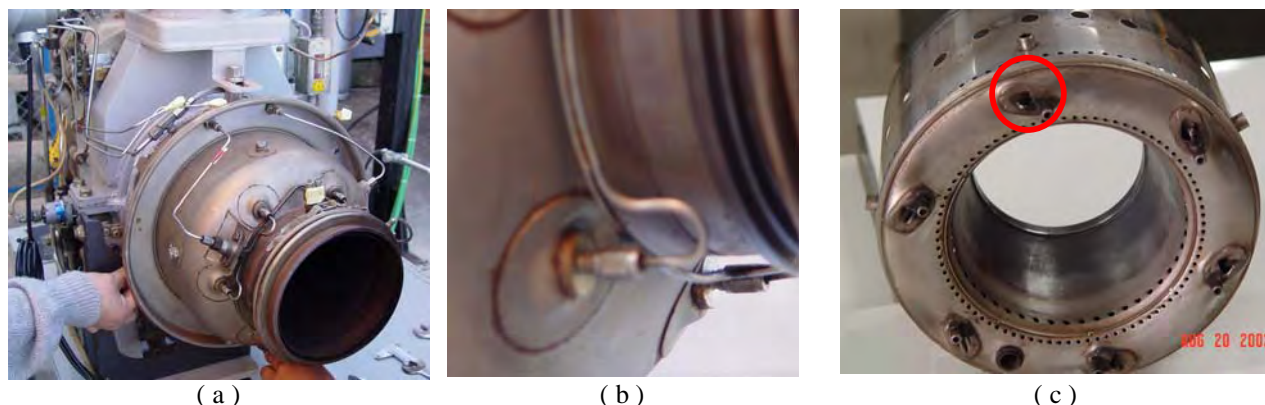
(a) Small gas turbine; (b) External detail of nozzles; and (c) Combustion chamber with 6 nozzles (one of them is shown by red cycle)
